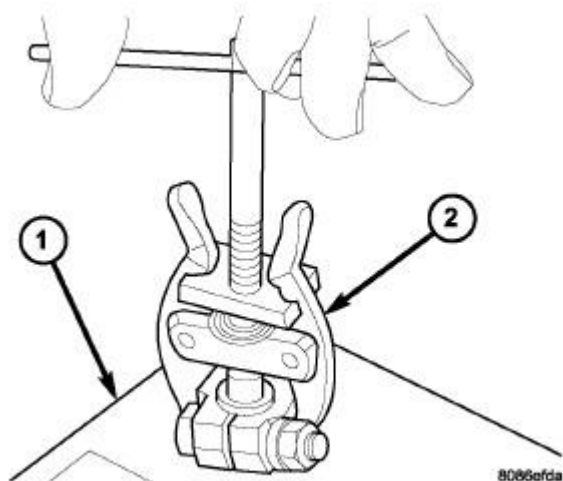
FRONT COVER SLIDE BUSHINGS
